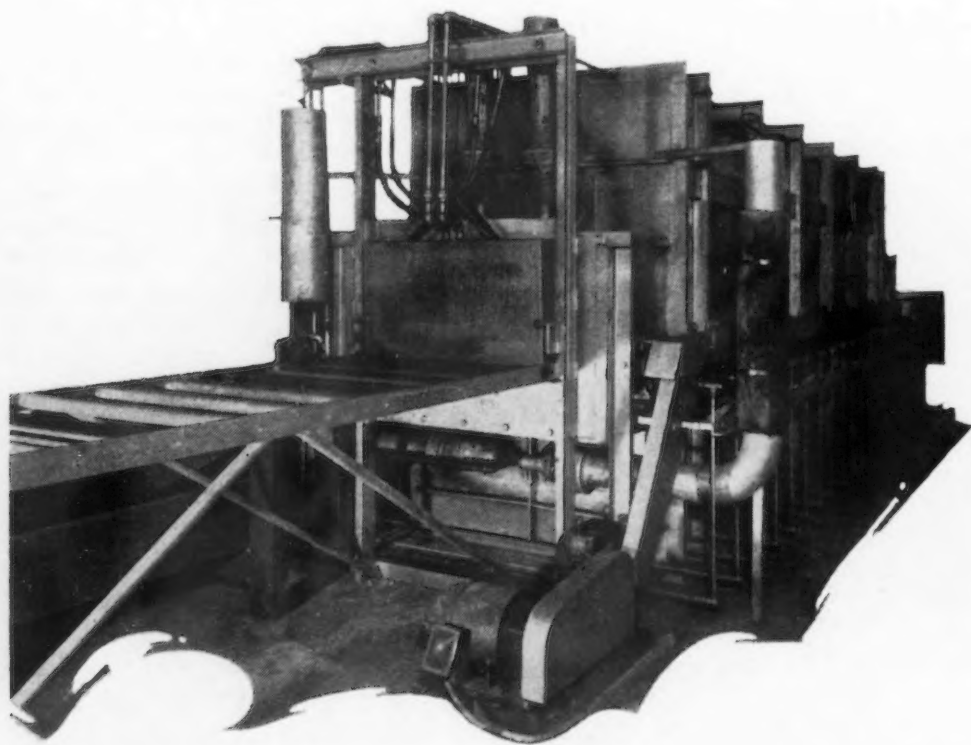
Refractory radiant tube, refractory roller hearth annealing furnace. Photo courtesy Gas Machinery Co.
